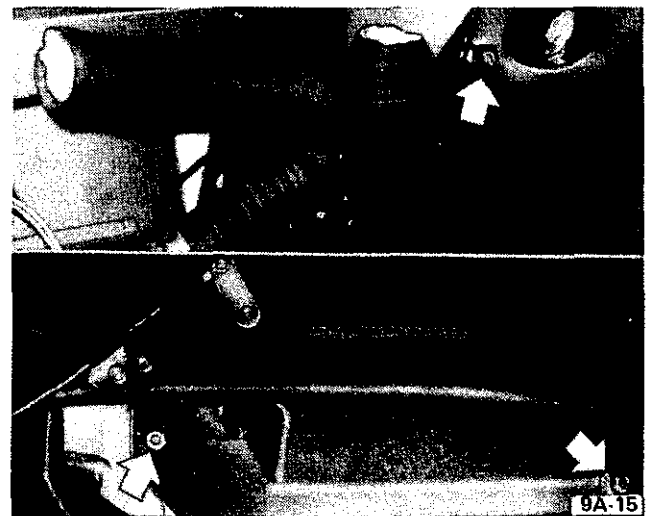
A-15 Location of Heater blower Case Bolt and Screws
